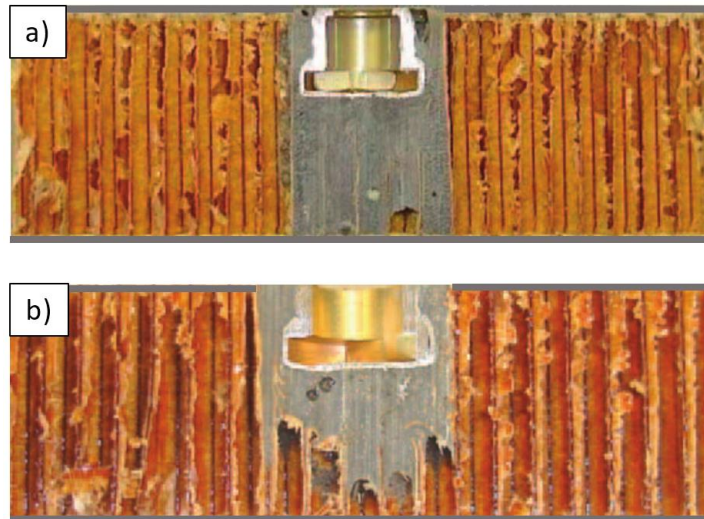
Cut of a) a full potting insert, the potting is bonded to both skins b) partial insert, bonded to only one skin [28].
